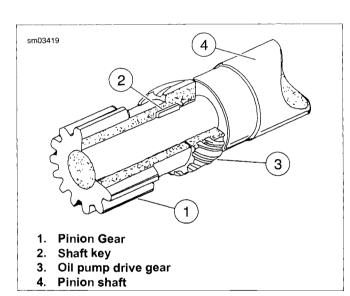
Oil Pump Drive Gear and Pinion Gear Installed on Pinion Shaft
